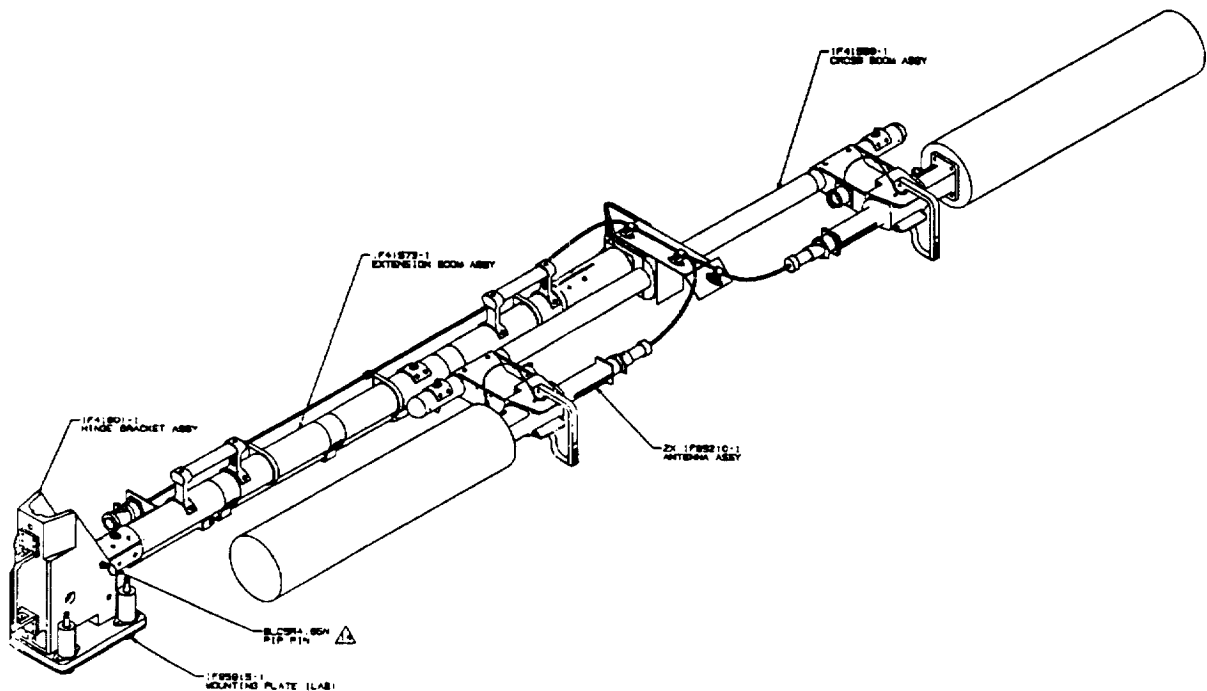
The UHF Antenna and Deployment Assembly in the Stowed (folded) Position
